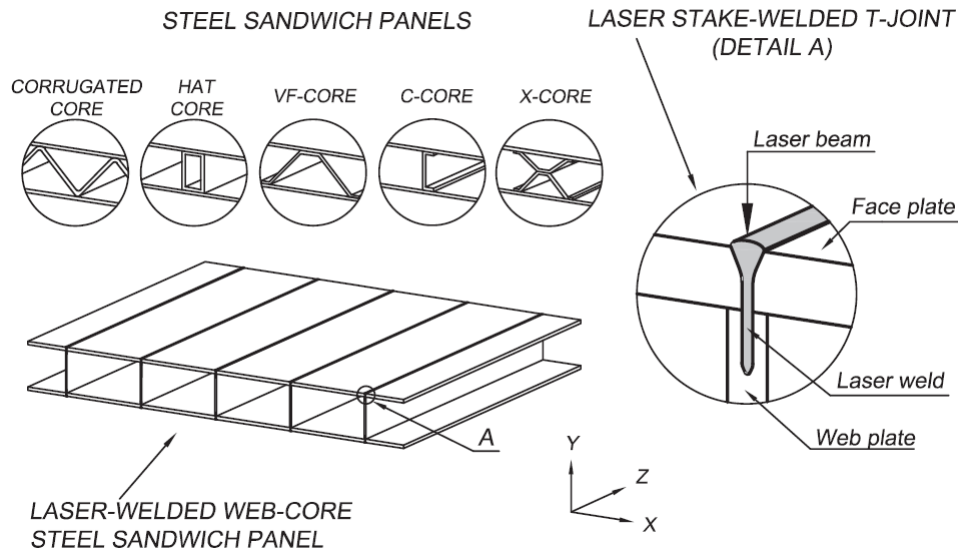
Steel Sandwich Panels Joined with Laser Stake-Welded T-Joint [6]
